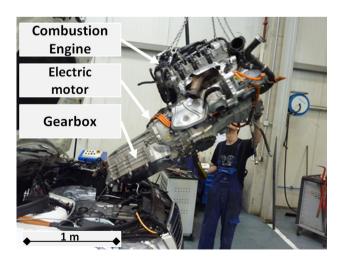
Extraction of a propulsion system (combustion engine, electric motor, and gearbox) from a series-produced HEV of the manufacturer Daimler AG via a remote-controlled crane [52]
